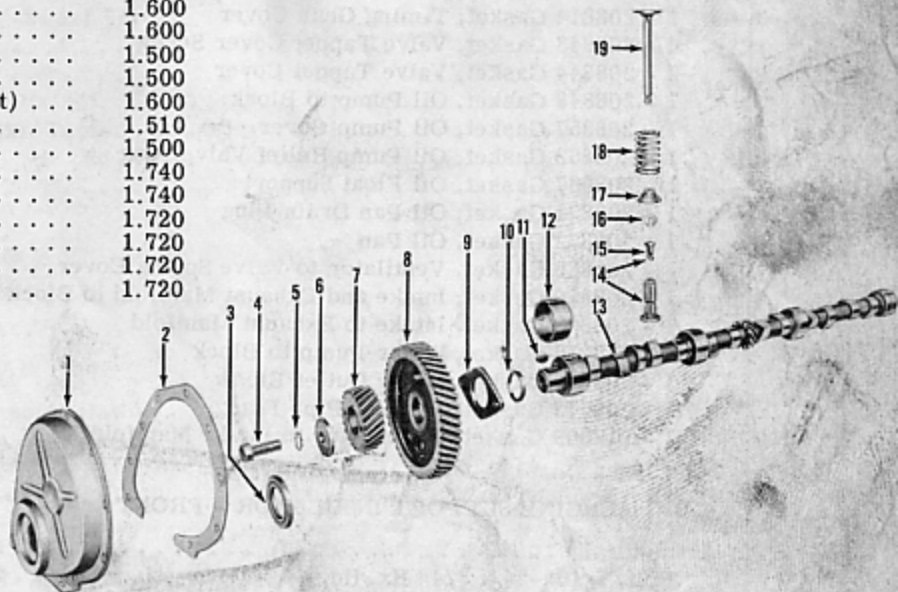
CAMSHAFT—6 CYLINDER—EXPLODED VIEW
